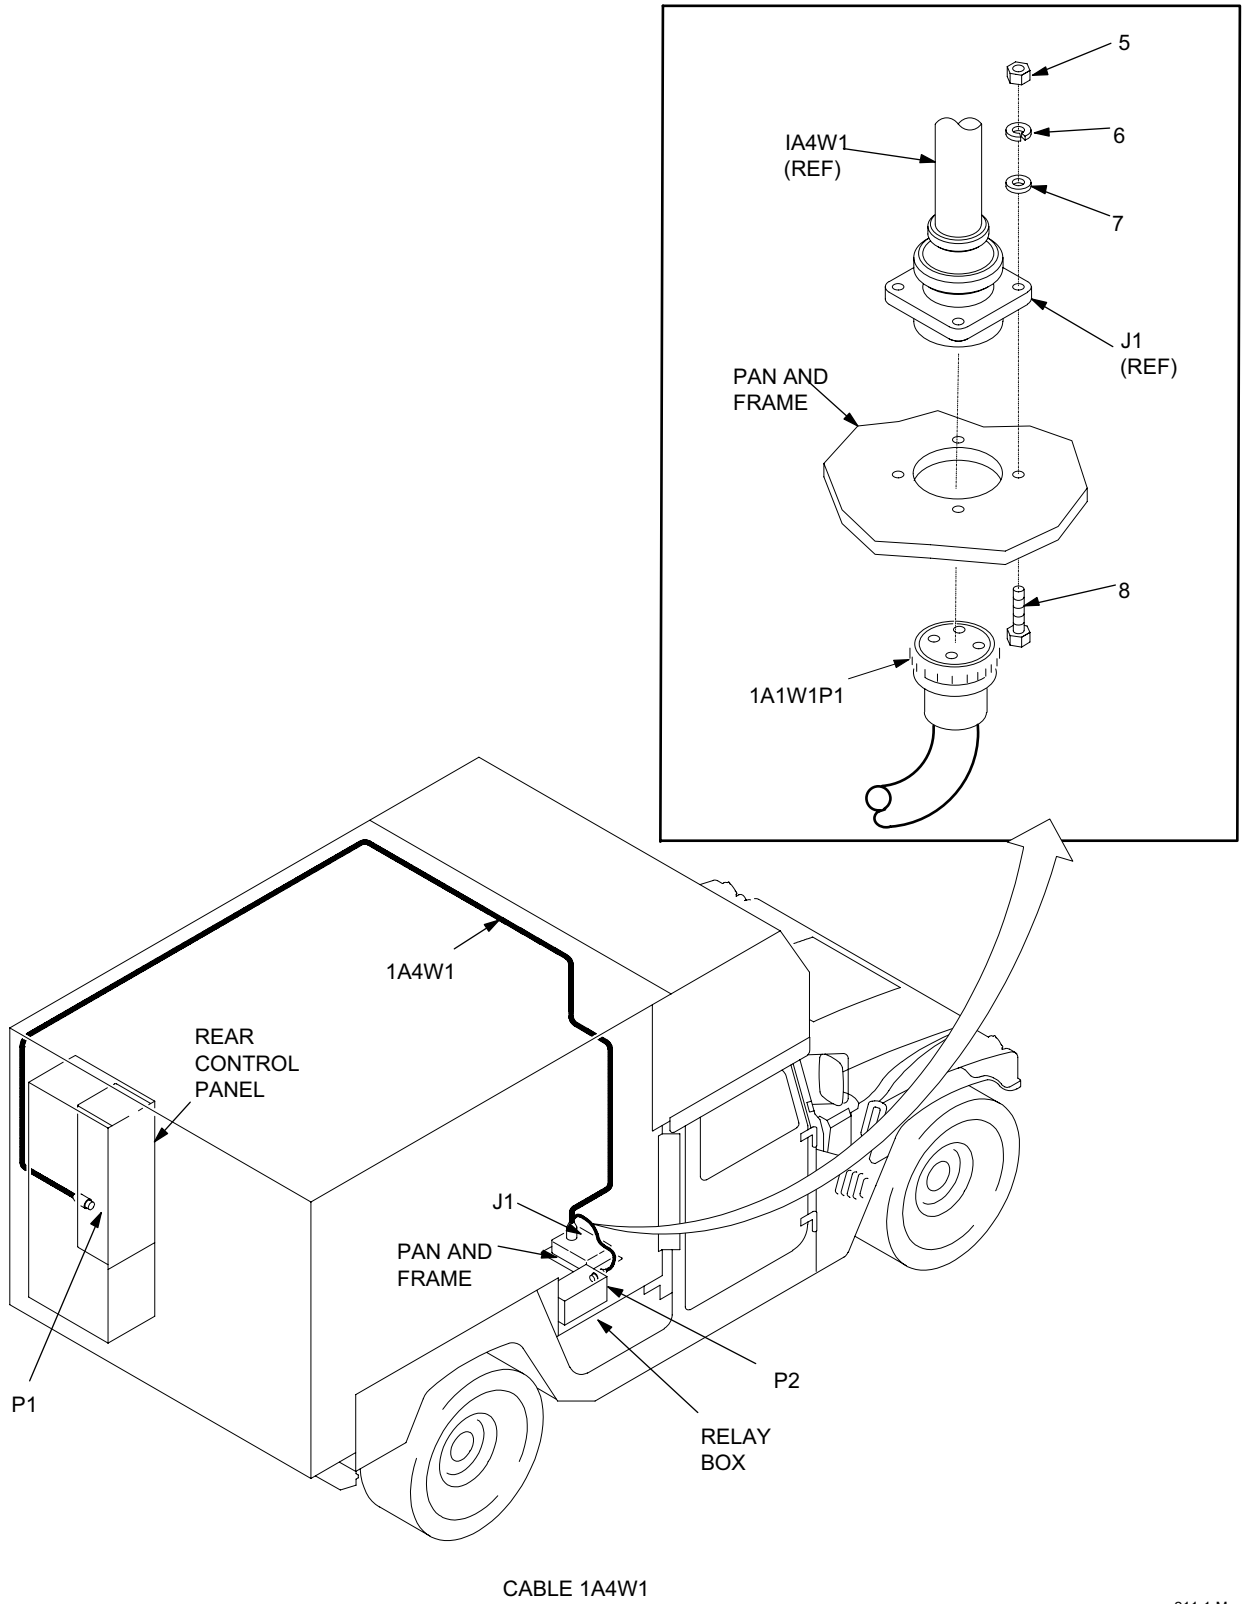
Electrical Cable Replacement (Sheet 4 of 12)
